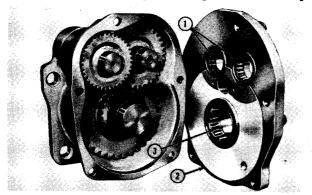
FACE PLATE, REMOVED 1. Bearing 2. Face Plate 3. Output Shaft Bearing
